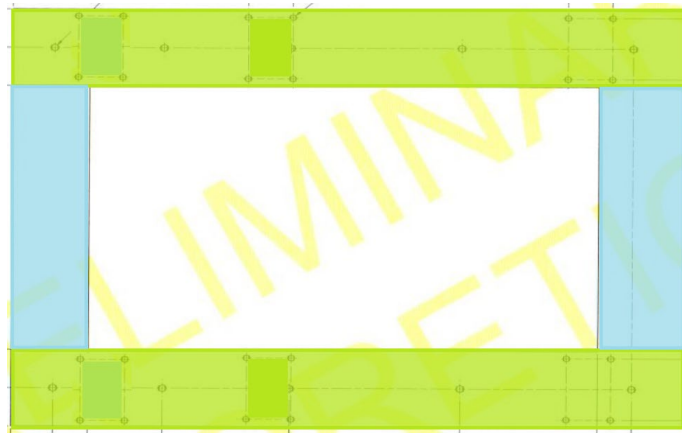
Fabrication of the Rail Bearing Mount Plate (2921-396) as four (4) individual parts (two green and two blue) welded together as one
